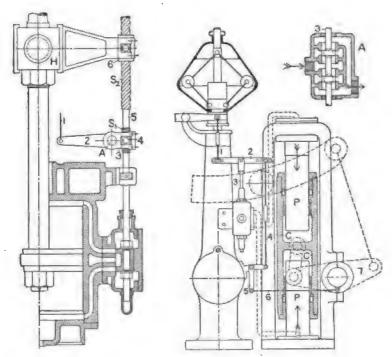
Part of Brown Reversing-gear, for Marine Engines.
